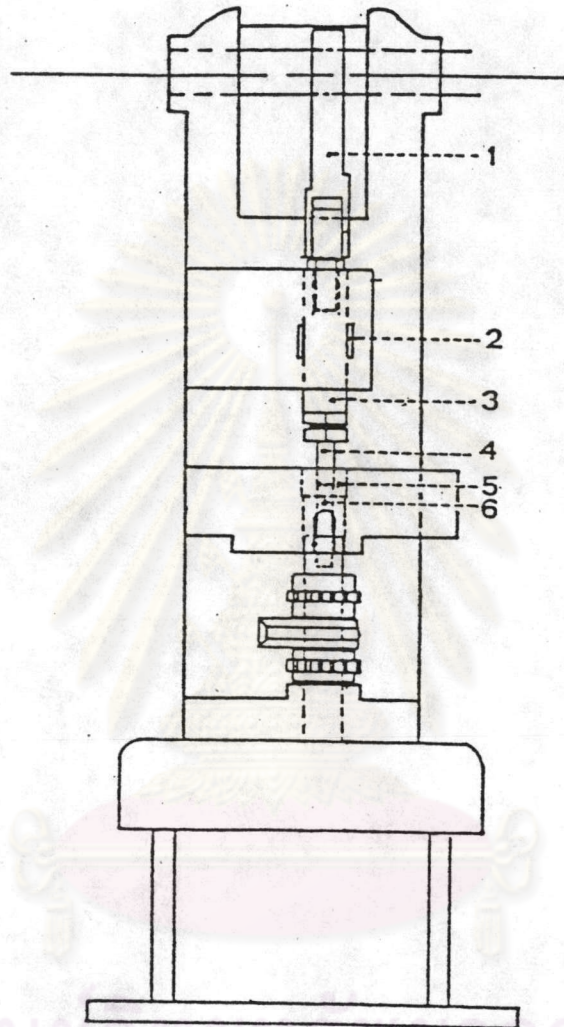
Schematic Drawing of the Instrumented Tablet Machine
